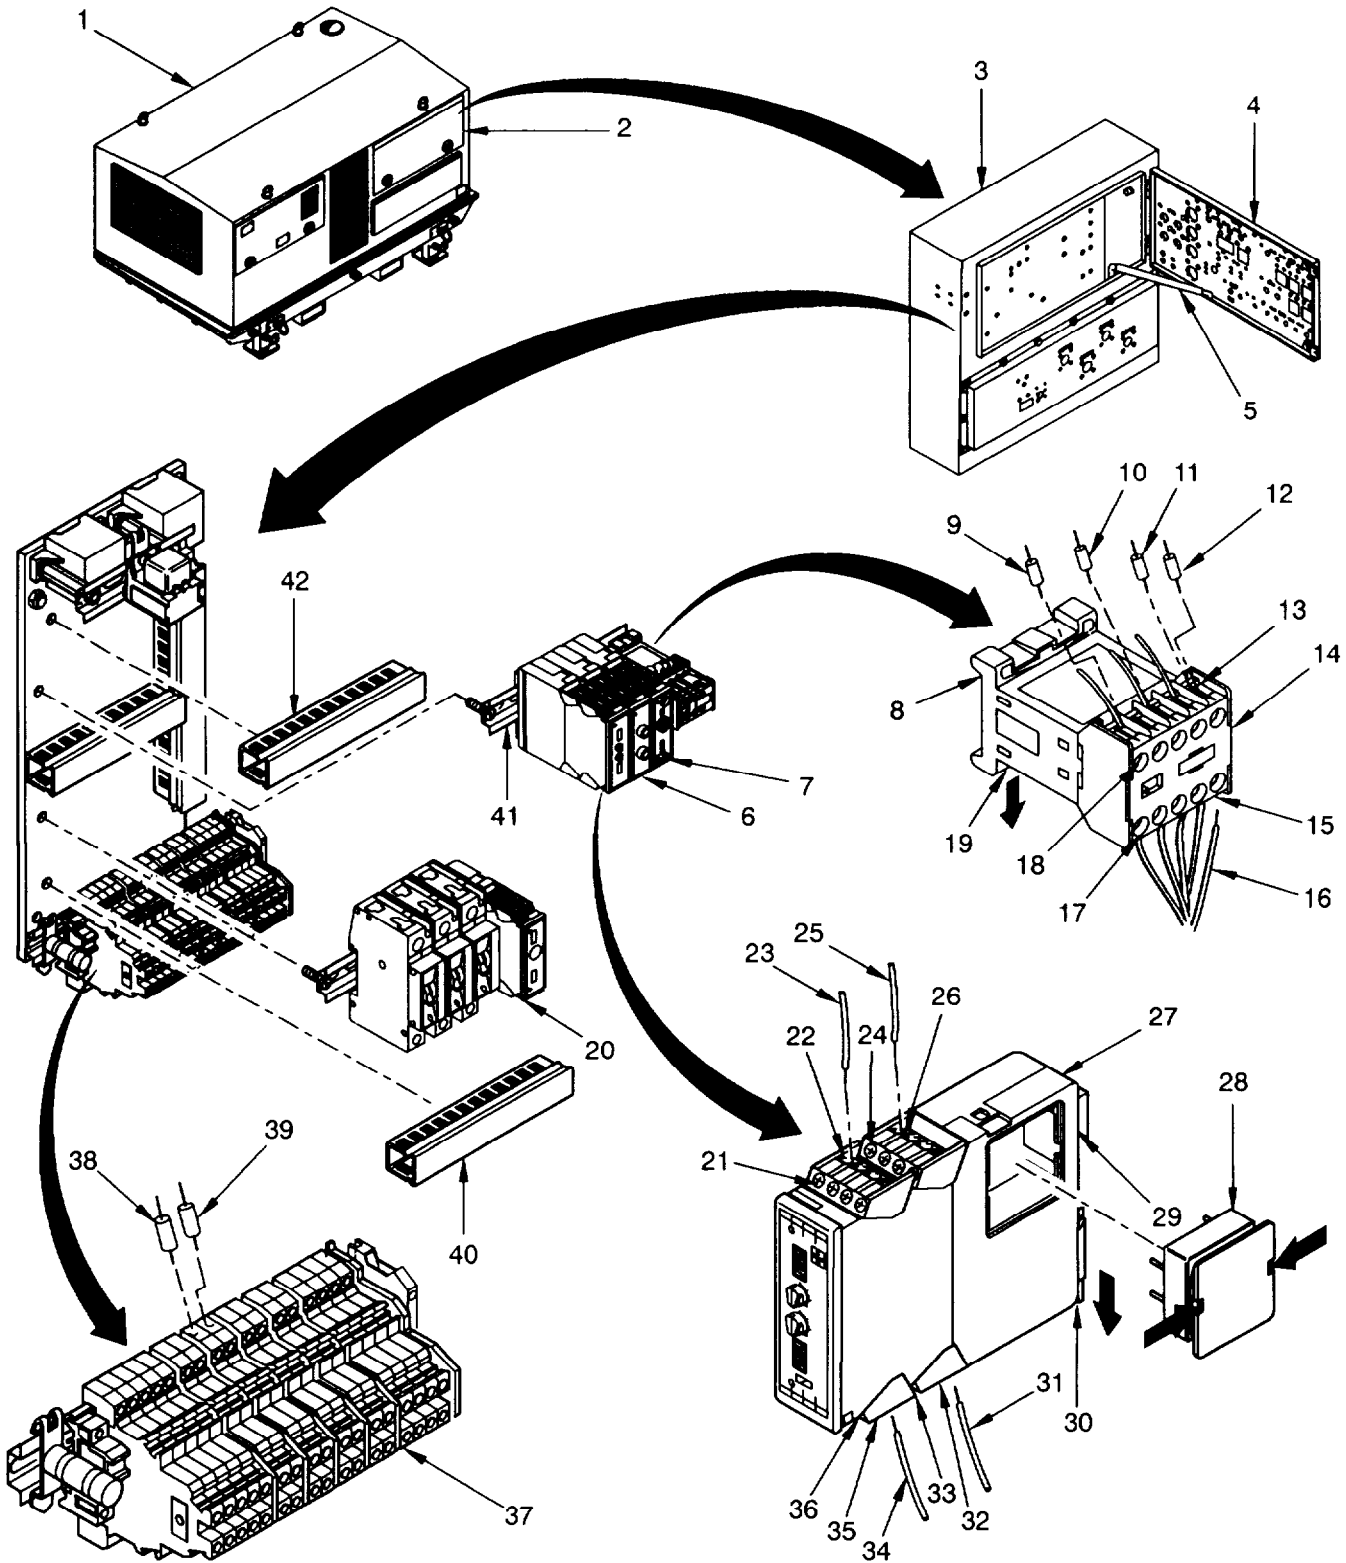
Control Cabinet Assembly, Engine Preheating Control Board, Auxiliary Contactor K109, Diodes, Time Relay Maintenance.
